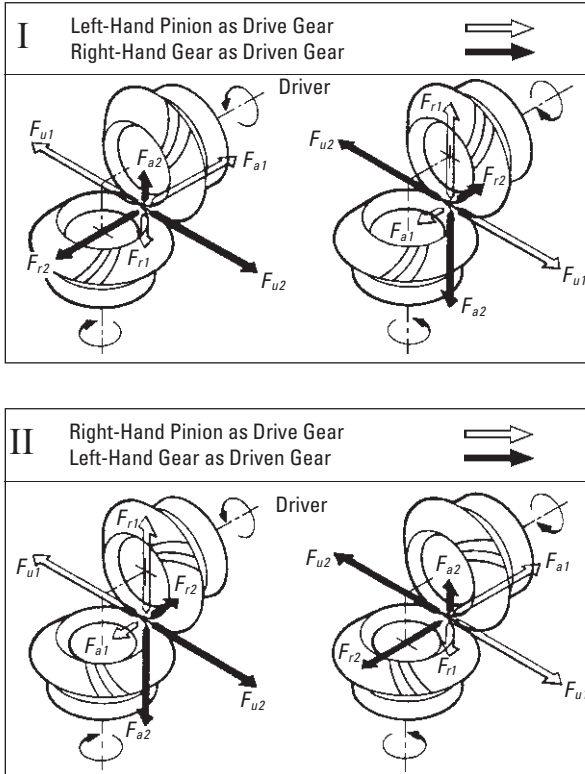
The Direction of Forces Carried by Spiral Bevel Gears (1)
